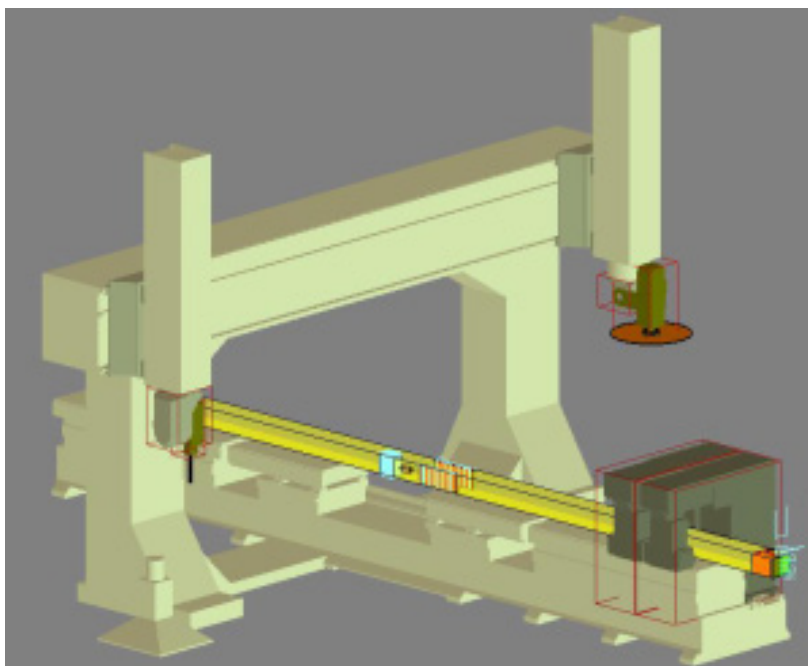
The concept of "Robot" carpenter machine - the example of the construction - the company FANUM "Kappa"
